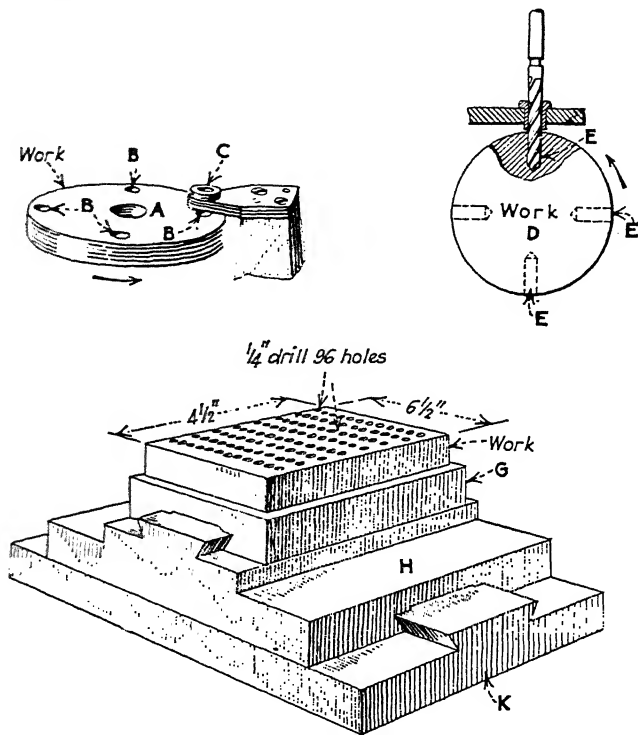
Several Examples of Work Requiring Indexing Jigs
